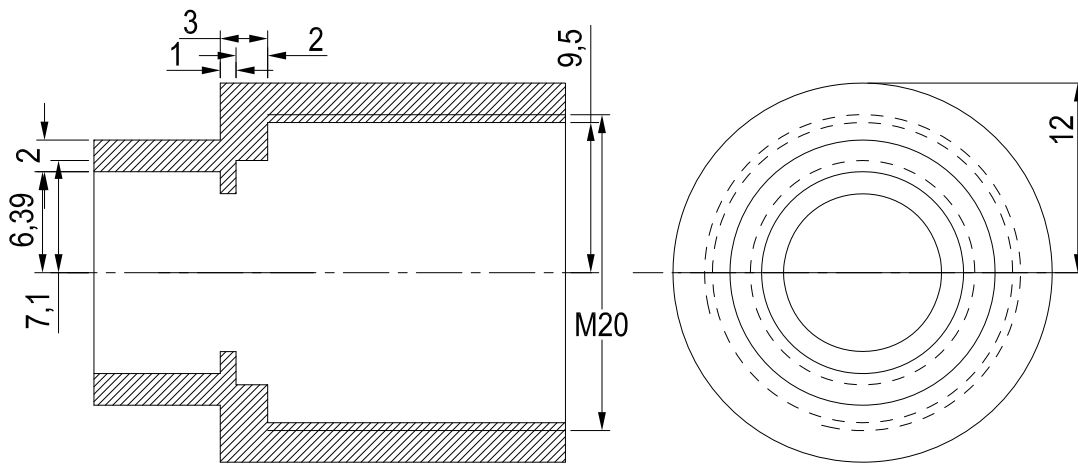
Profile of the primary nozzle holder with overall dimensions, all dimensions in mm.
